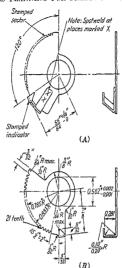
Gear sector: (A) former two-piece welded construction; (B) redesigned onepiece stamping. (White-Radgers Electric Co.)
